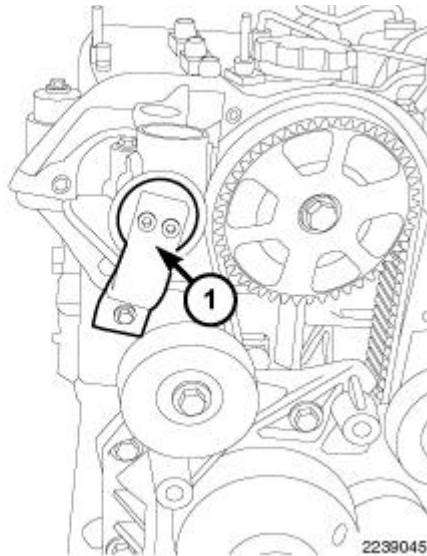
Mark Across Reluctor Wheel & Exhaust Camshaft
